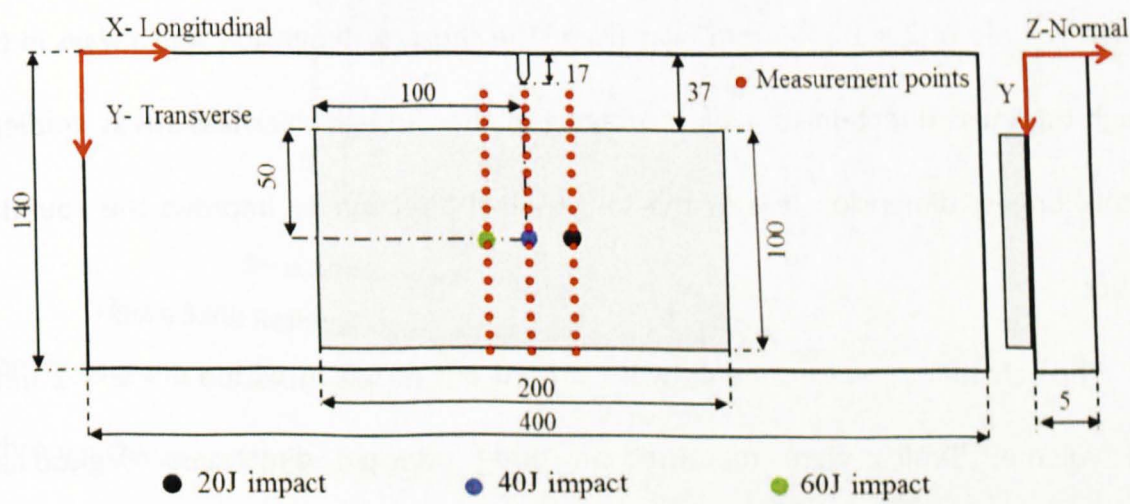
Fatigue crack growth test setup at ENGIN-X
